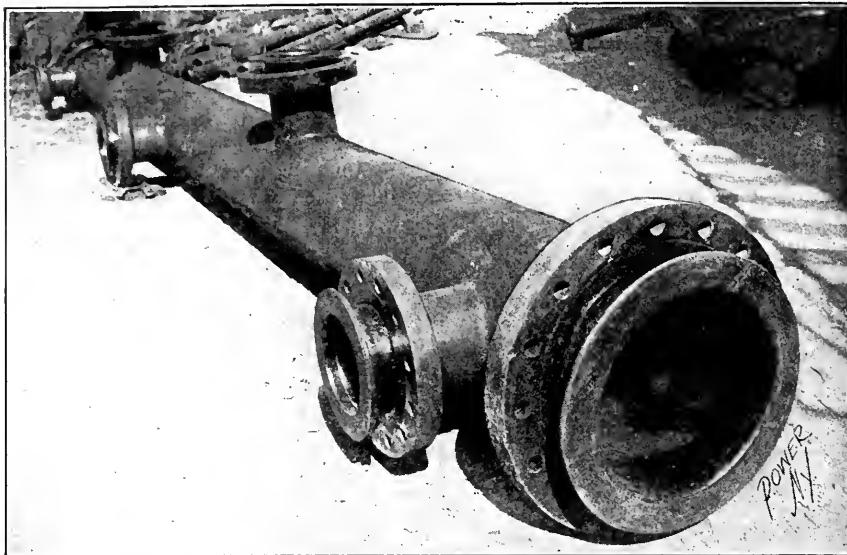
NOZZLES WELDED TO STEEL HEADER
